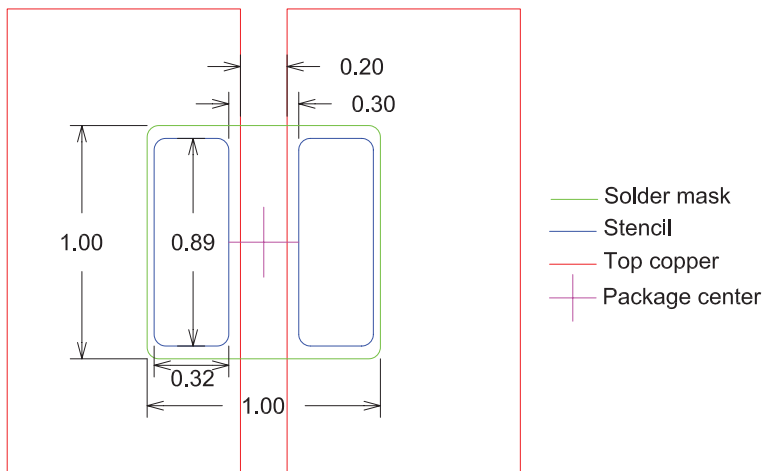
Recommended PCB solder pad layout for LUXEON UV FC1.
